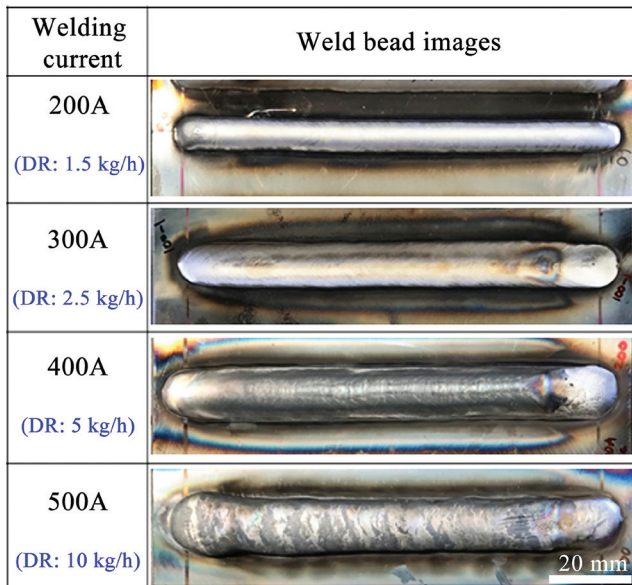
Weld bead appearance at different welding currents (welding speed 20 cm/min).
